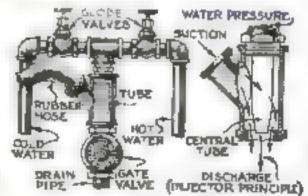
Attachment for emptying a weshing machine. The construction is shown at right.
